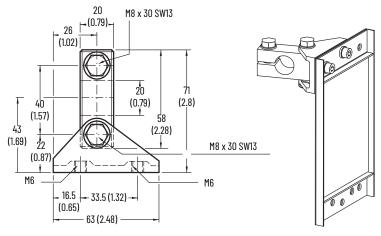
Spring-fastening Mounting Kit 440L-AMKIT for Corner Mirrors
